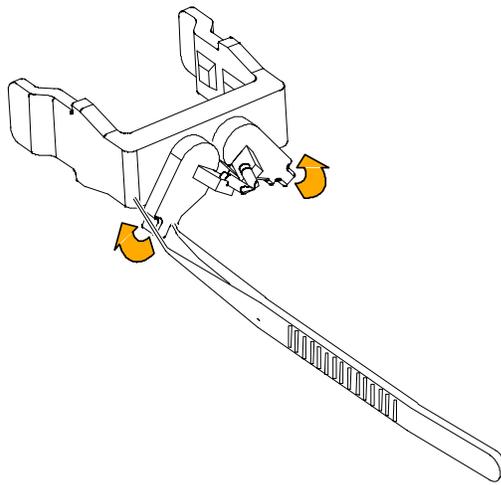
15: Adjusting the variable spacing Tip-Clip assembly
